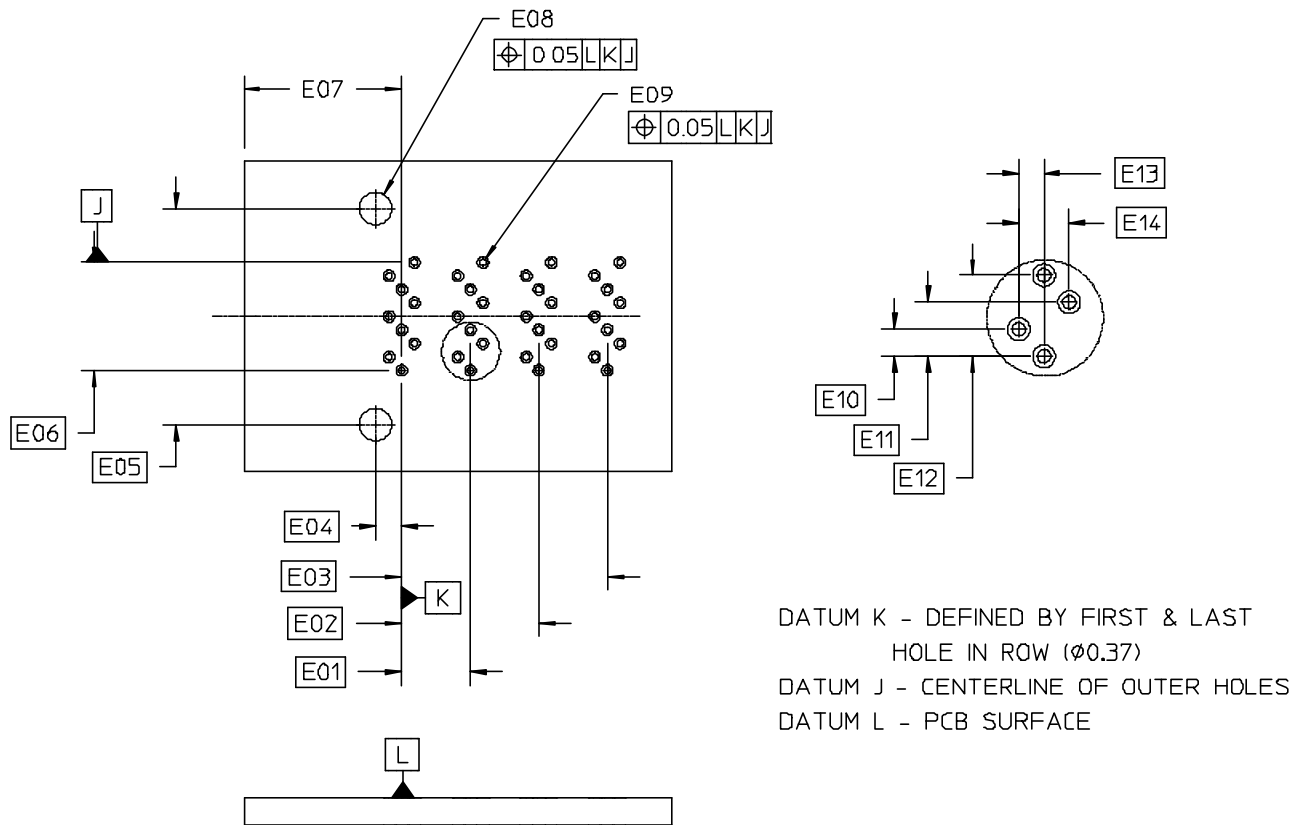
UNSHIELDED FIXED (RECEPTACLE) 1X1 RIGHT ANGLE INTEGRATED HD CONNECTOR FOOTPRINT
